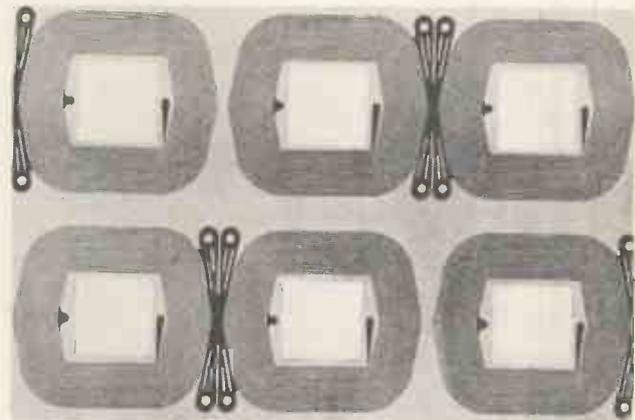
Transformer winding of etched copper on foldable backing (Technograph Printed Circuits Ltd.)
